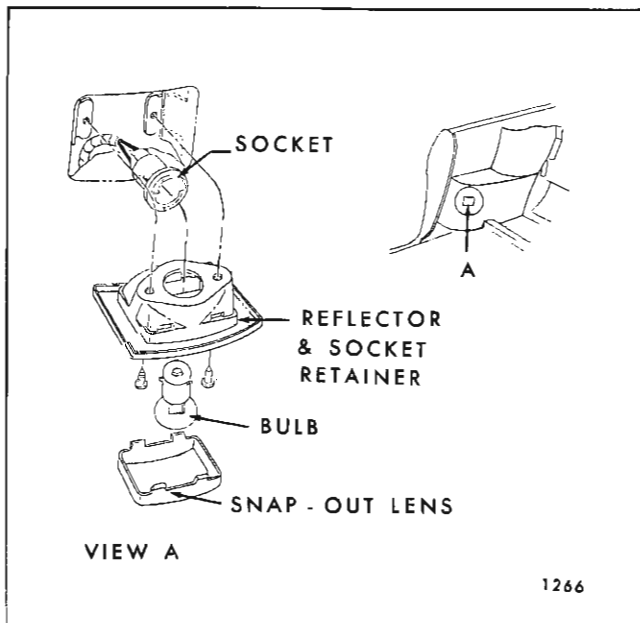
E3—Rear Quarter Arm Rest Lamp Assembly
